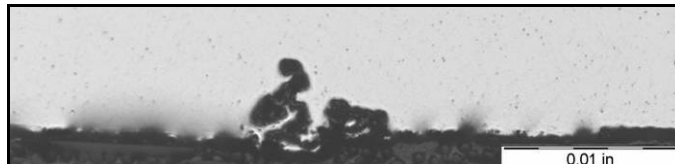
Representative Appearance of Test #7 Weld Surfaces (ID)
